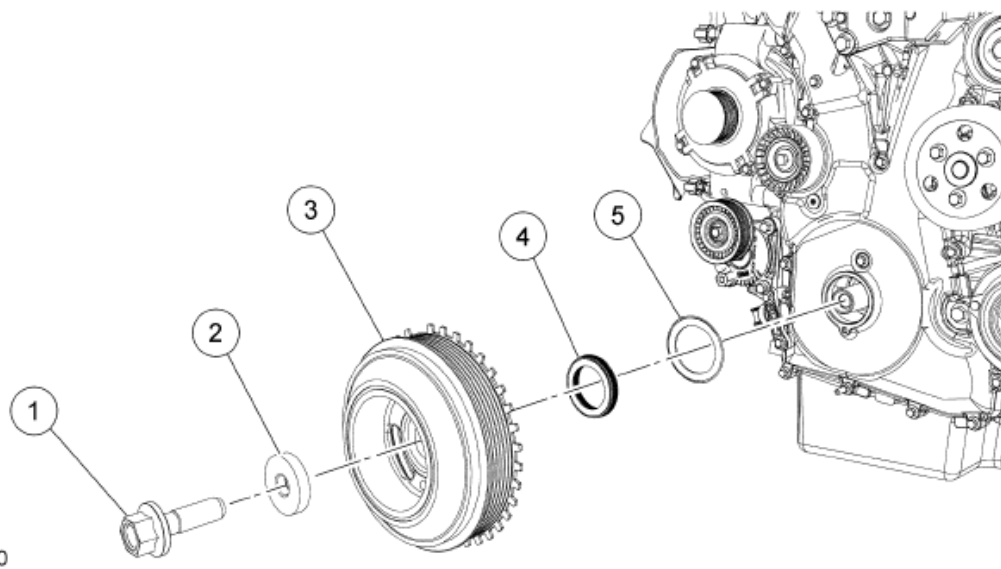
Identifying Crankshaft Pulley And Crankshaft Front Seal
